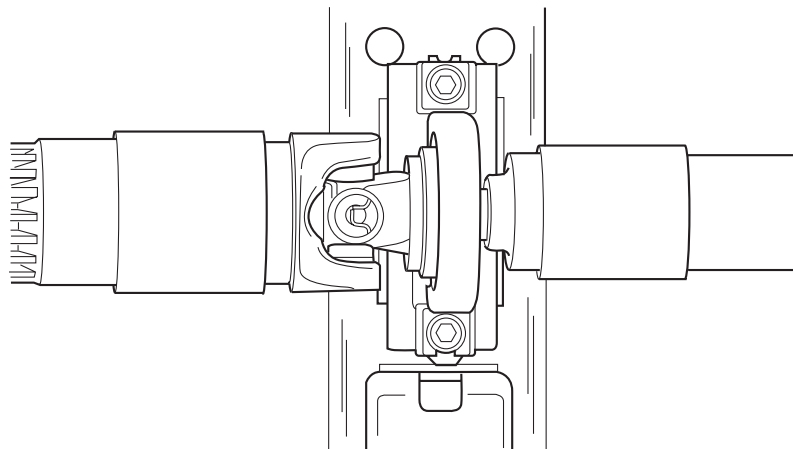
VIEW OF CENTER BEARING BRACKET
